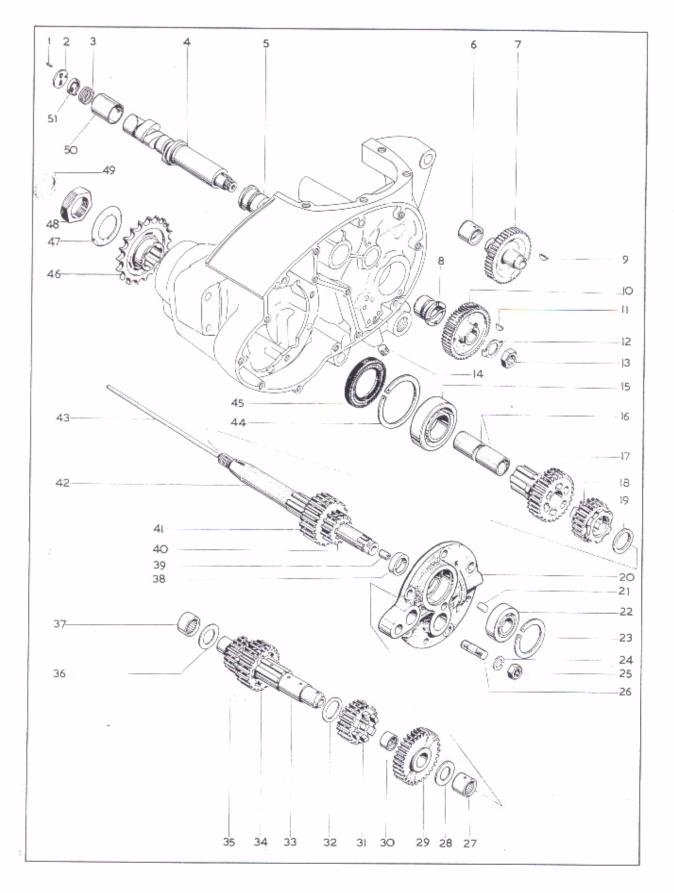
OIL PUMP — GEARBOX SPROCKET — PRESSURE RELEASE VALVE
